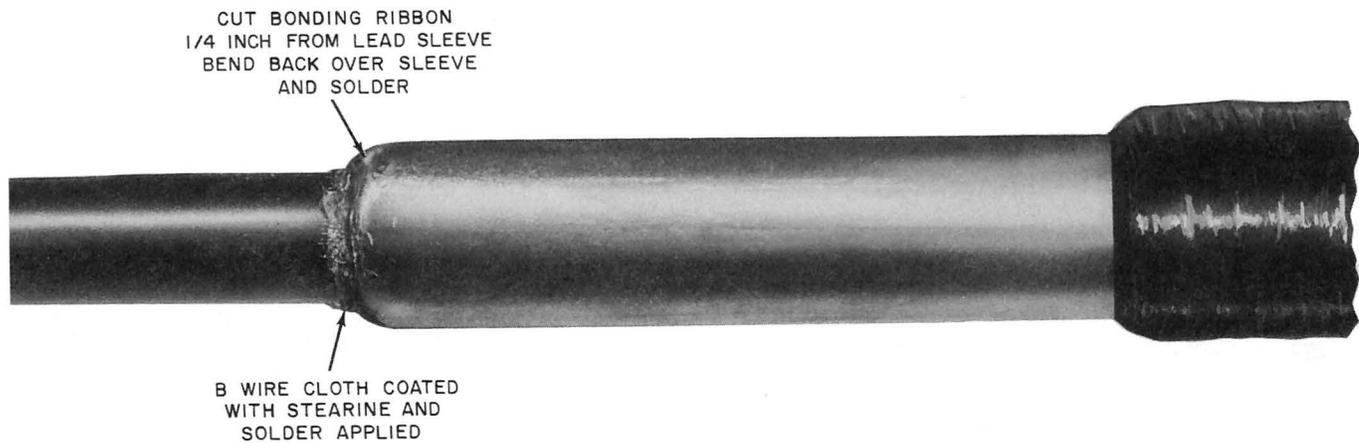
Auxiliary Sleeve Beat-in and Solder Applied
